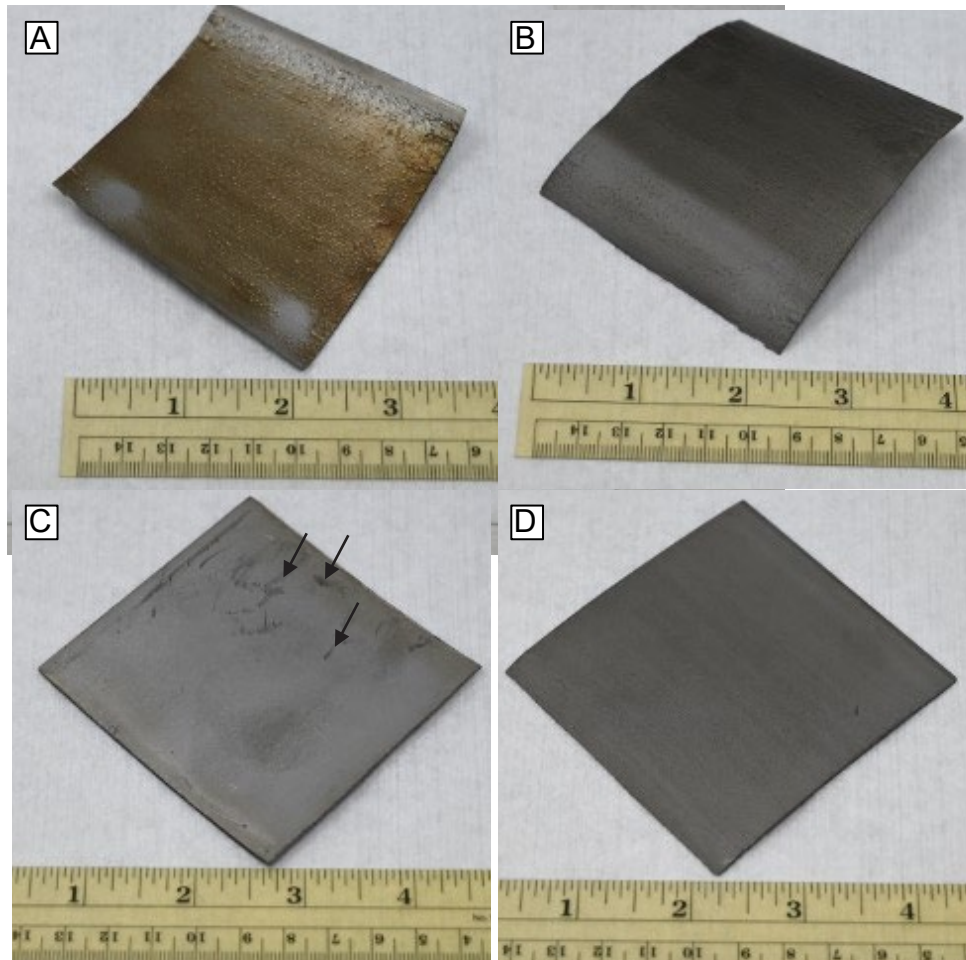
Partial leading edge shapes formed by Nb cold spray that exhibit spray surface-mandrel interface pit defects (A) that propagate to the surface of the spray (B). Discoloration on the pitted sample is also evident. Similar shapes that show less pitting defects on mandrel contact surfaces (C). Scuff marks are from a wedge used to initiate part release, some of which are indicated by the arrows. Top surface of a released part with minimal defects (D).
